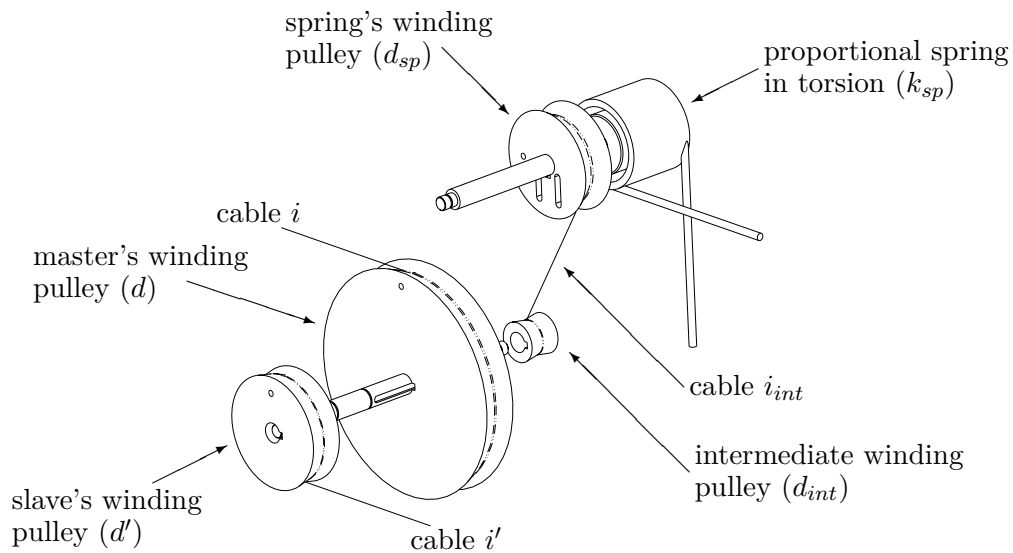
Exploded view of the CAD model of a spring-loaded winding-pulley assembly.
